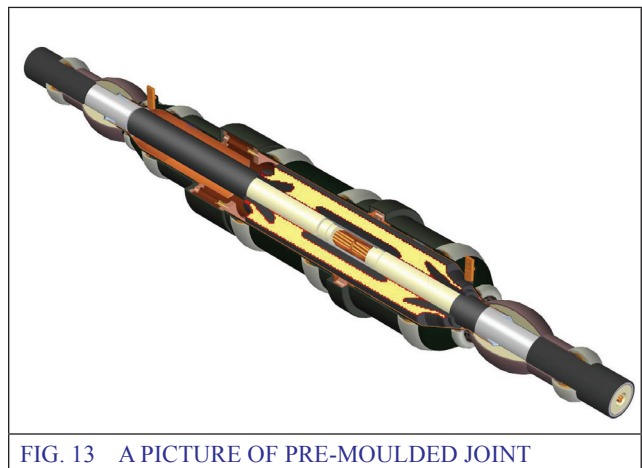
A PICTURE OF PRE-MOULDED JOINT
